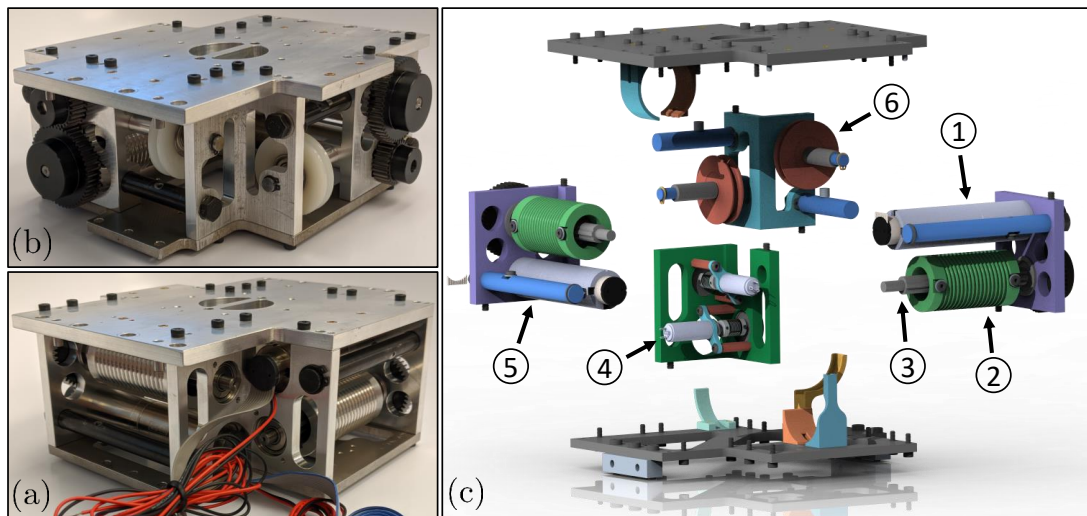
The continuum segment actuation unit (a) front view (multi-turn potentiometers not shown), (b) back view, and (c) exploded front view showing the ① gearmotor, ② actuating capstans, ③ ball splines, ④ multi-turn potentiometers, ⑤ tensioning shafts, and ⑥ idler pulleys.
